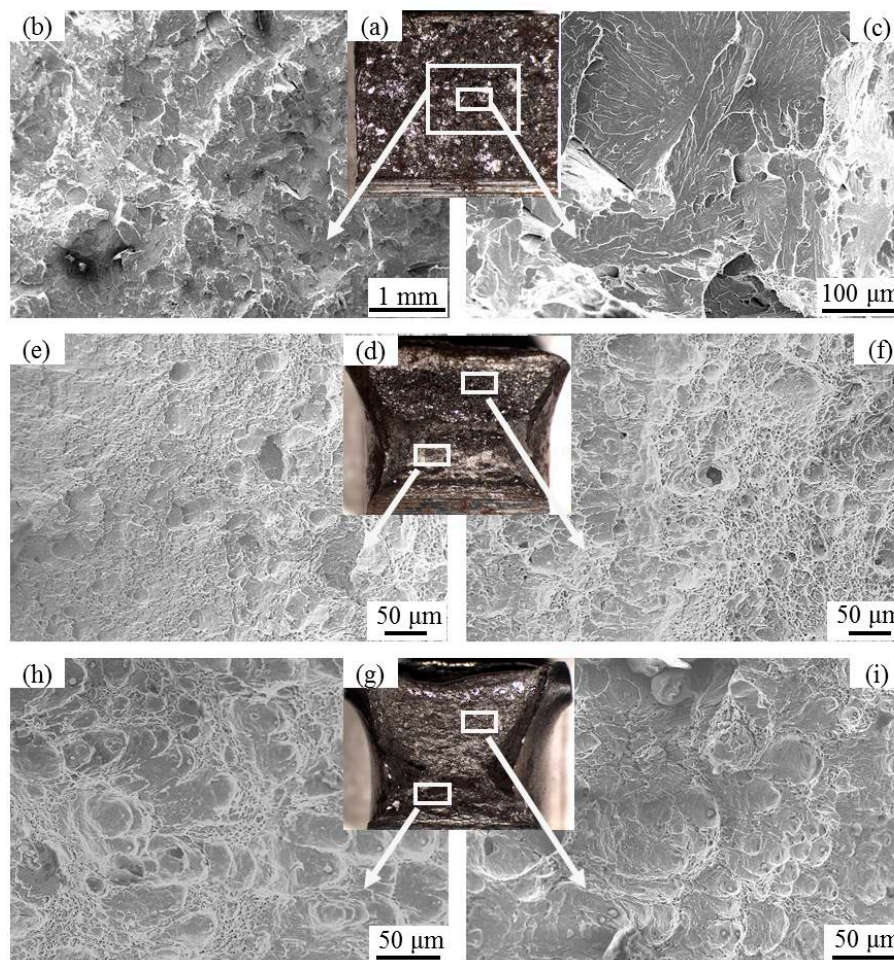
Macro fractographs and SEM images of fracture surfaces of HAZs: (a–c) A; (d–f) C11; (g–i) C27.
